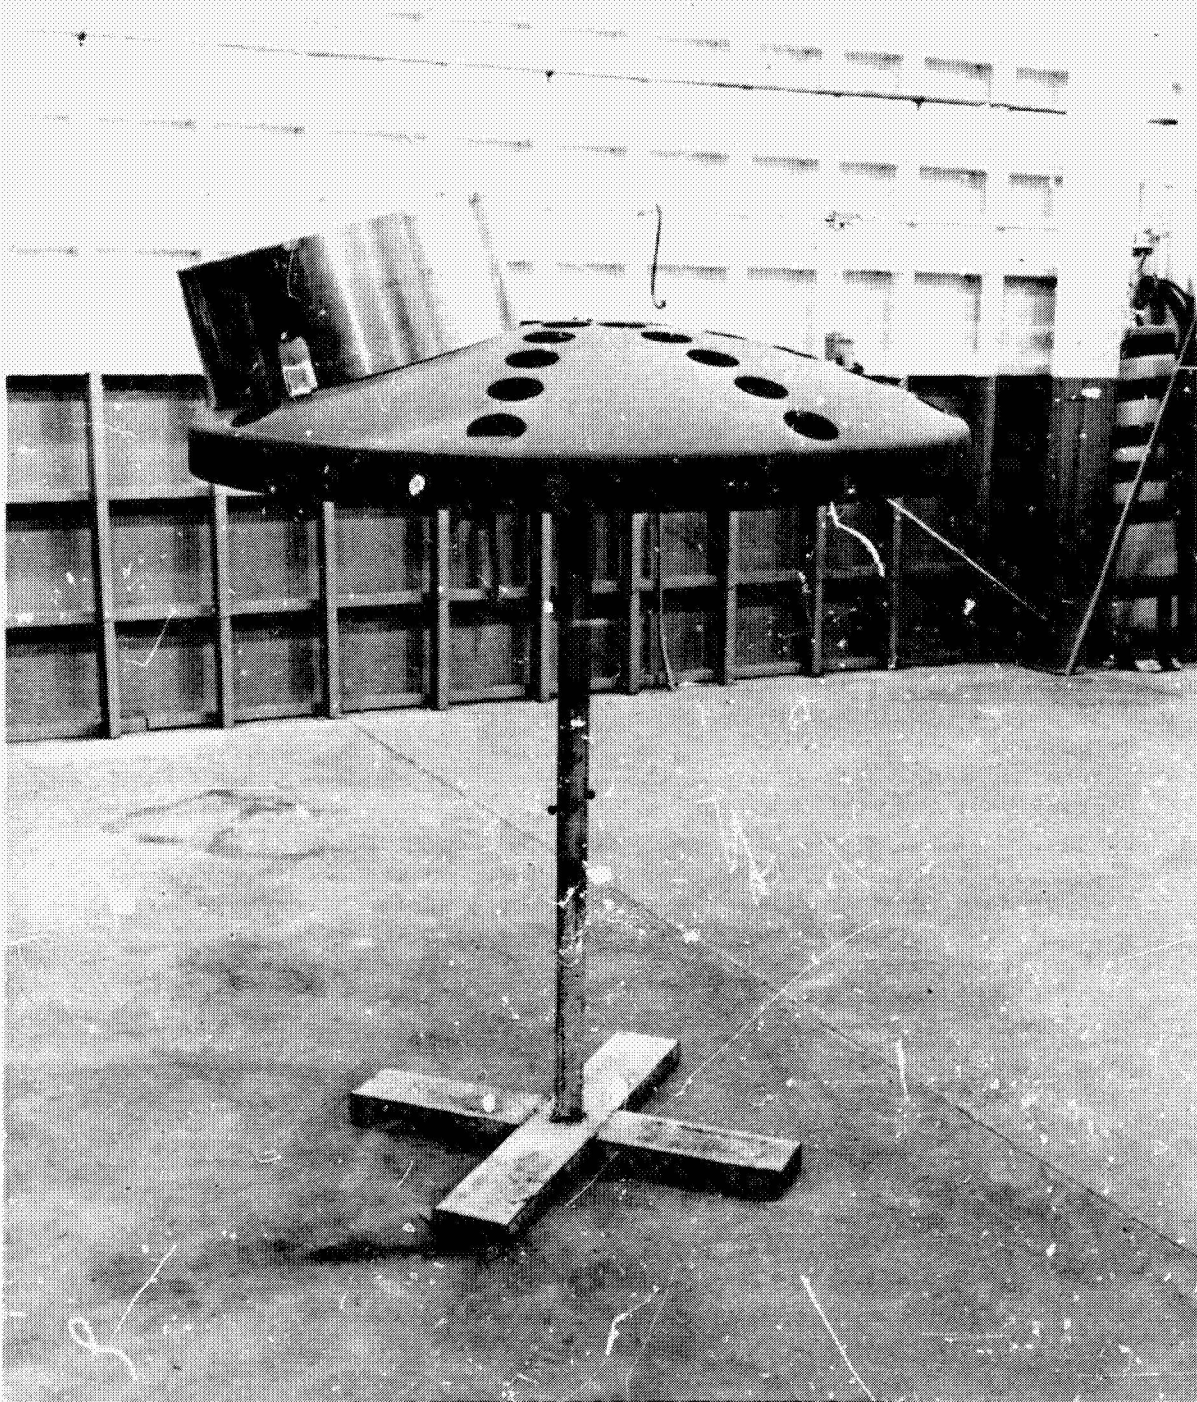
Dome Insulation Assembly Fixture with Manhole Cover Form
